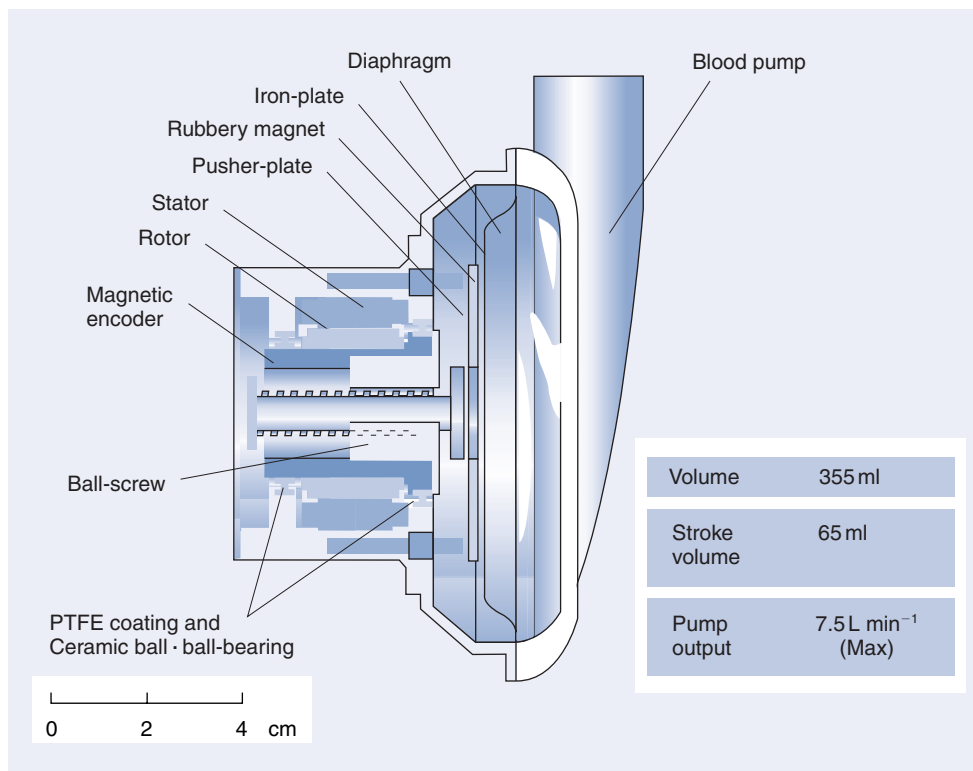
Cross-sectional drawing of motor-driven assist pump.
